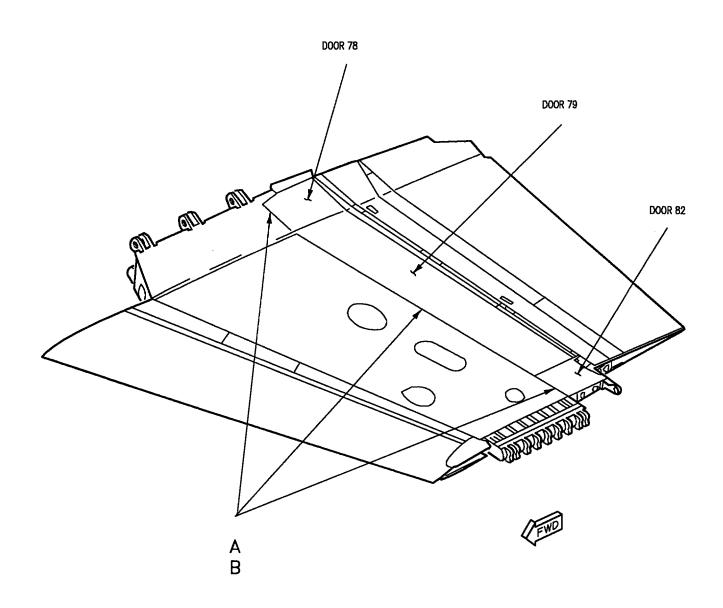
Bushings, Trailing Edge Flap Hinges, Removal and Installation (Sheet 2)
